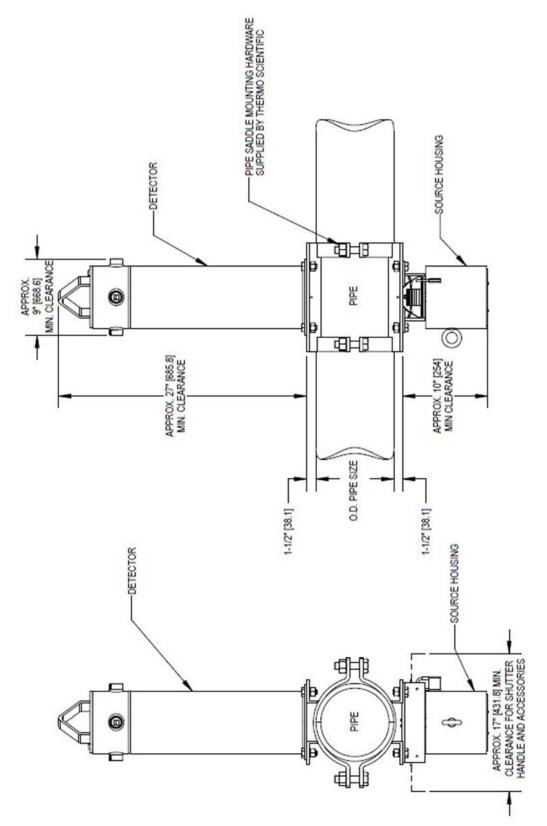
4-0700-148: Installation drawing, integrated system with explosion-proof housing
